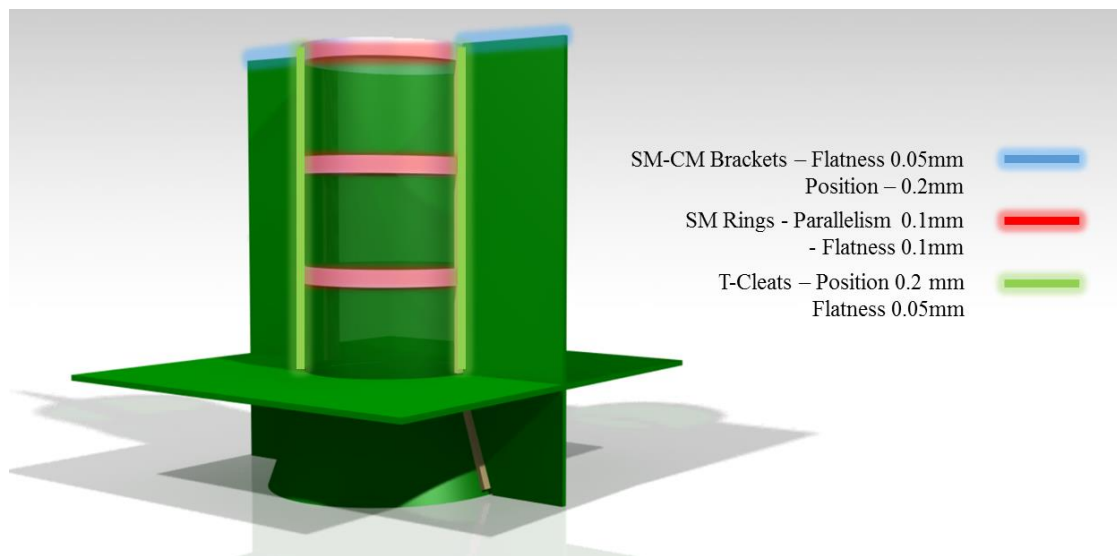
E3000/NEOSAT mock-up assembly critical features and tolerances.
